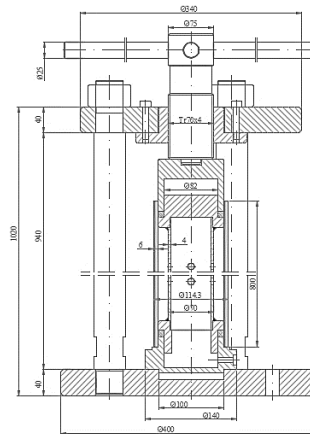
Experimental stand initially designed to determine the bursting pressure of pipes.
